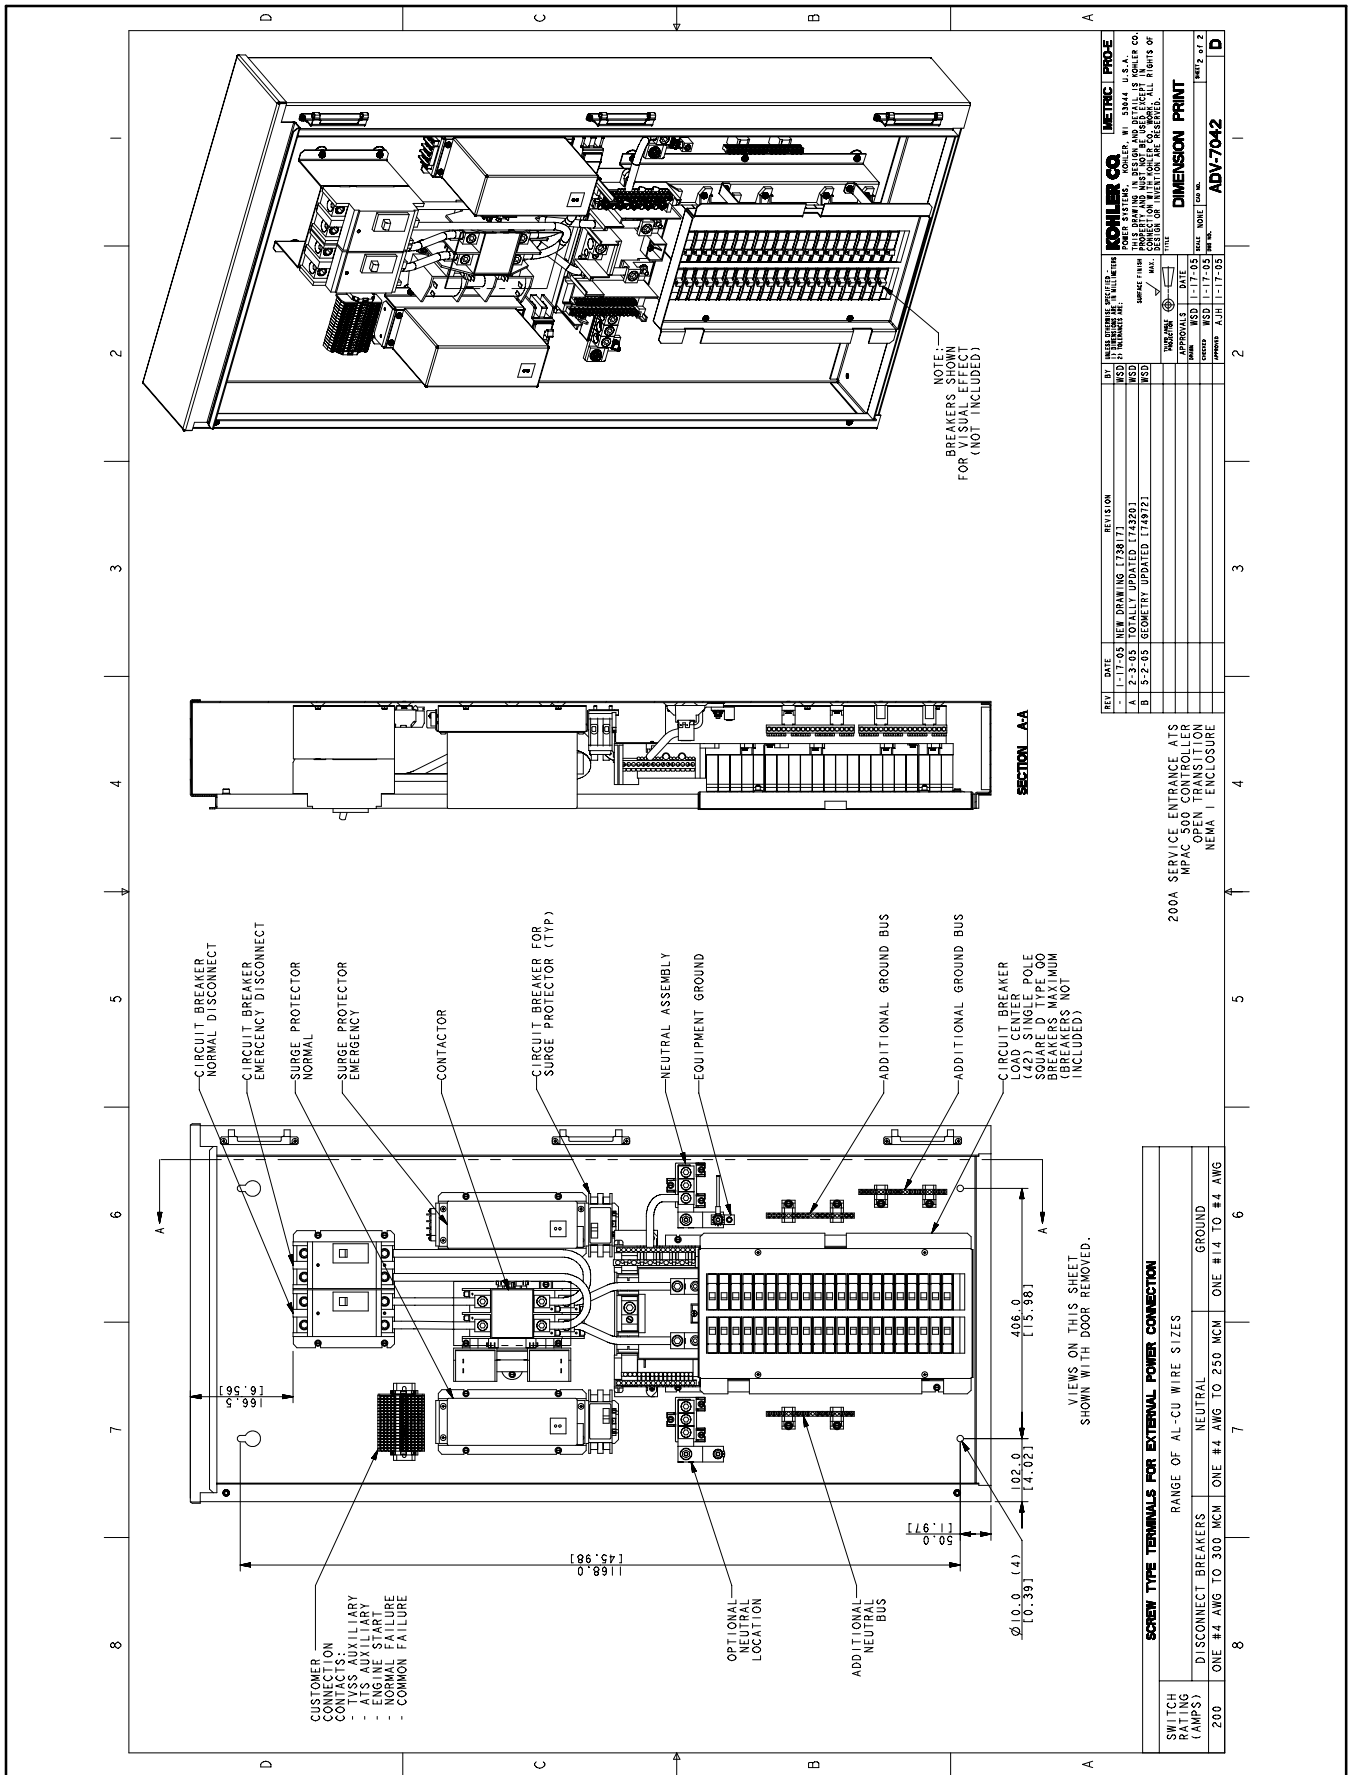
Dimension Drawing, Sheet 2, ADV-7042B-B
